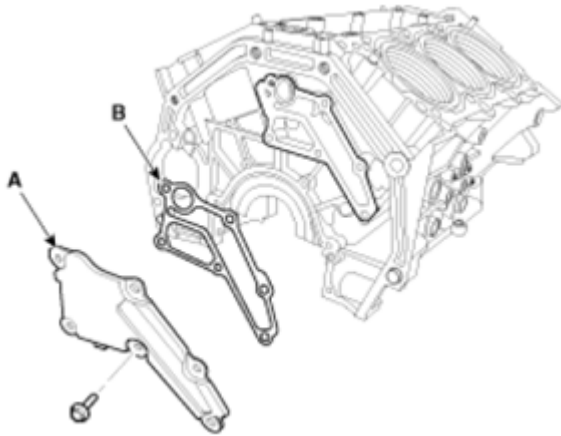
Rear Oil Seal CaseCourtesy of KIA MOTORS AMERICA, INC.
